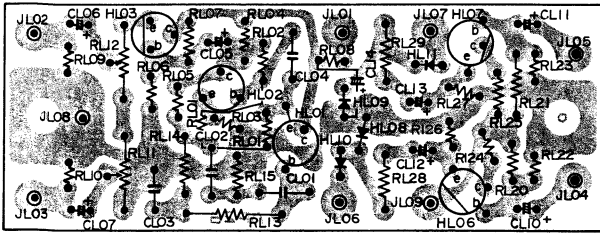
400Hz Oscillator and Meter Driver Assembly
